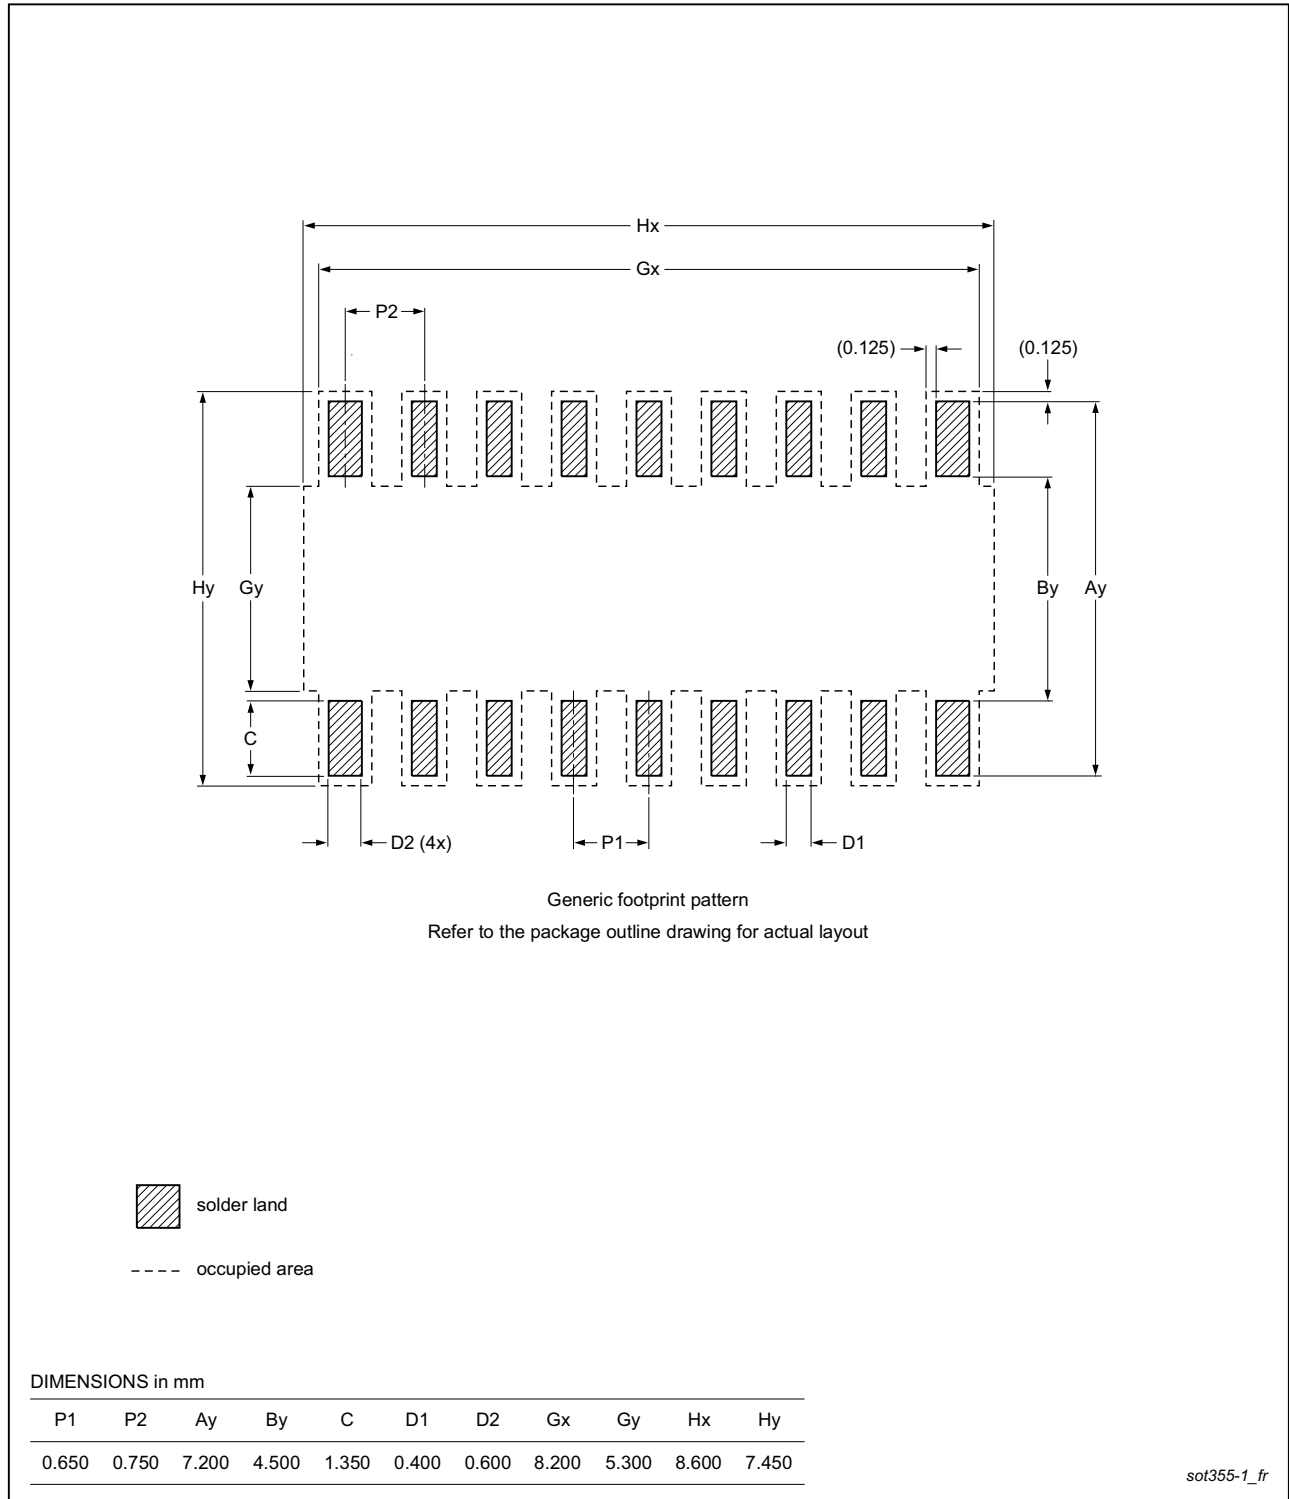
PCB footprint for SOT355-1 (TSSOP24); reflow soldering
